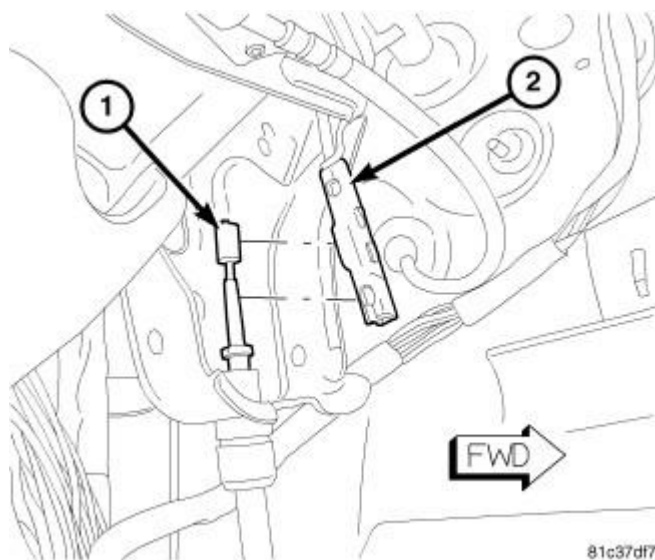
FRONT CABLE AT LEVER CONNECTOR
